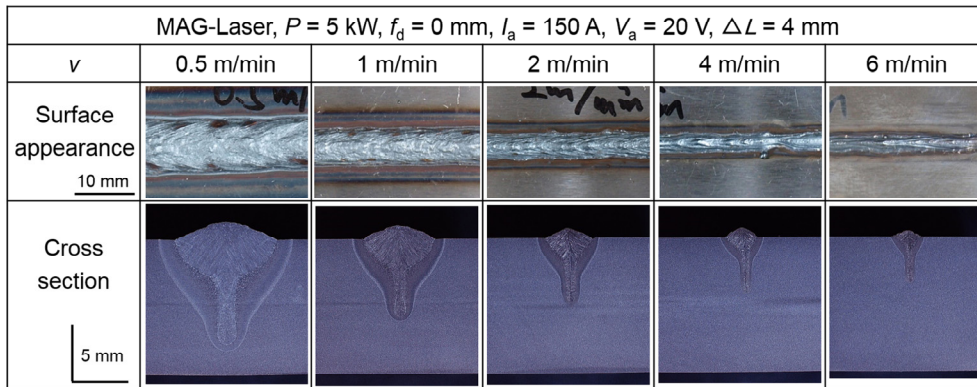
Surface appearances and cross sections of weld beads produced by MAG-Laser hybrid welding at various welding speeds.
